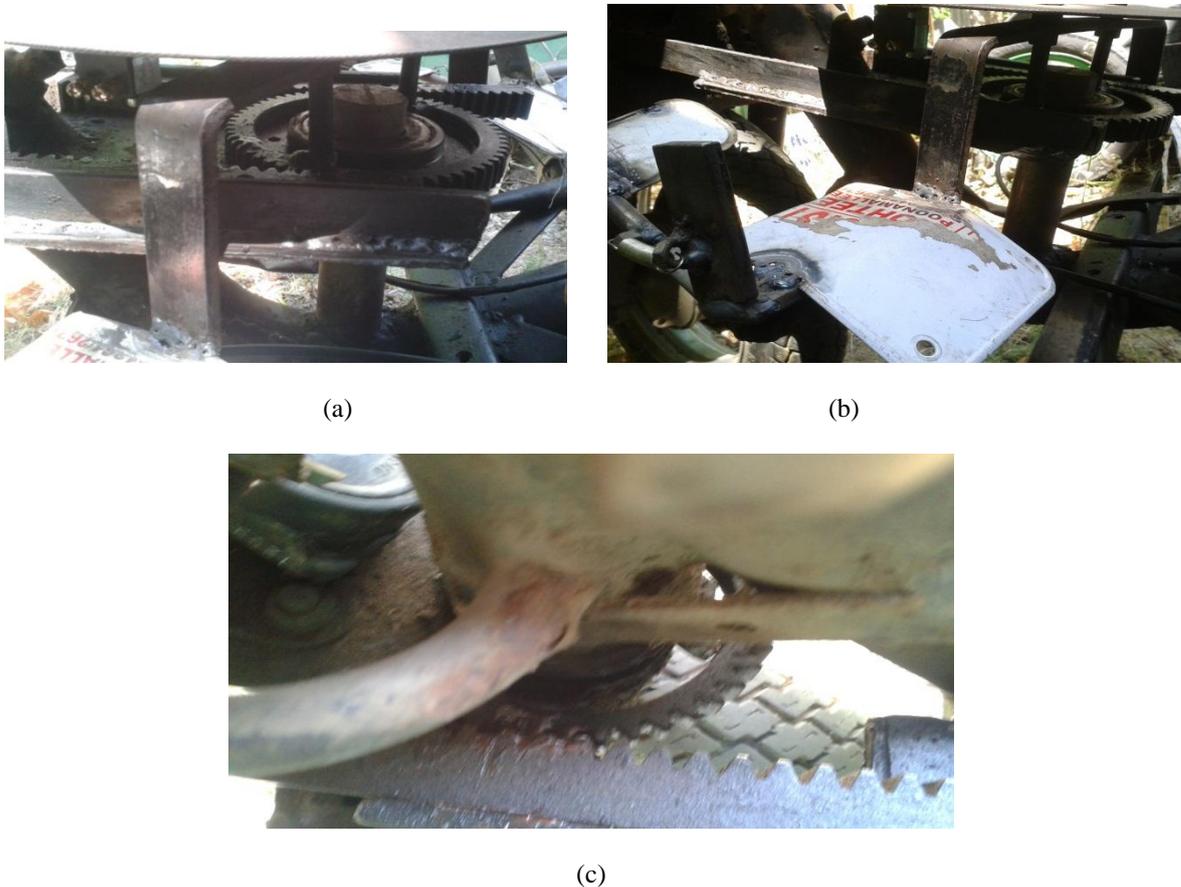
Prototype (a) Side view of the prototype (b) Base and brake pedal (c) Gear meshing with the rack
